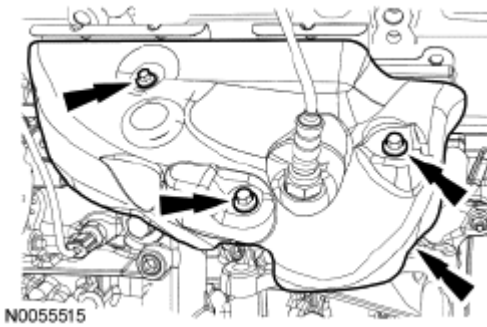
Locating Exhaust Manifold Heat Shield Bolts (LH)
